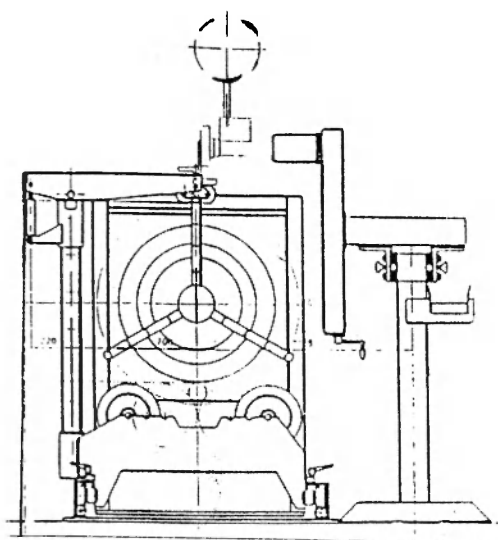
Plasma Welding Installation for tubes (100-1100) mm in diameter with two roller beds and welding head movable along 30 m long separate rails.
